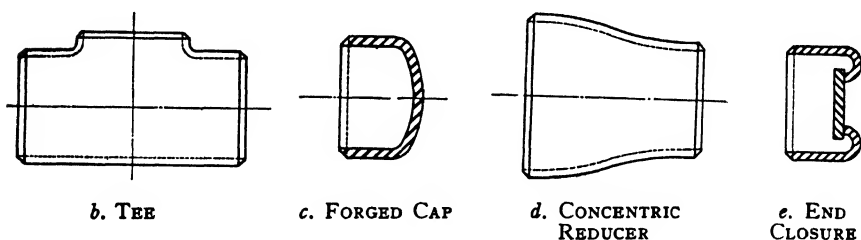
TYPICAL WELDING FITTINGS
